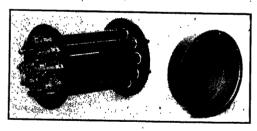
Frequency Multiplier F M-10. 50-kw. Oil Pan Removed and One Section of Core Partly Withdrawn to Show Construction
